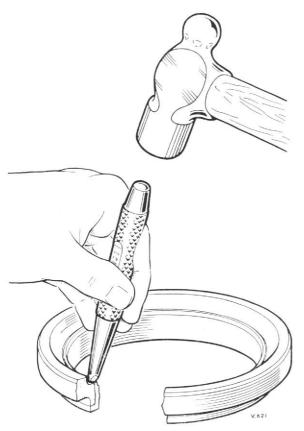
Using a hammer and peening punch T.78132 to lock the safety bearing in the sealing housing.
